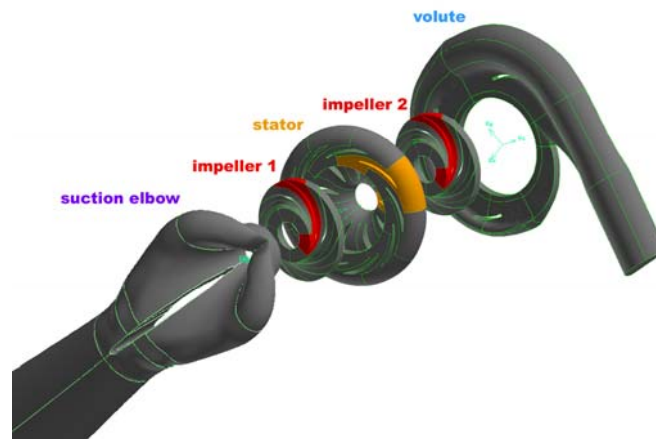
The three-dimensional view of the half hydraulic passages of the storage pump: suction elbow, first impeller, stator, second impeller and the volute
